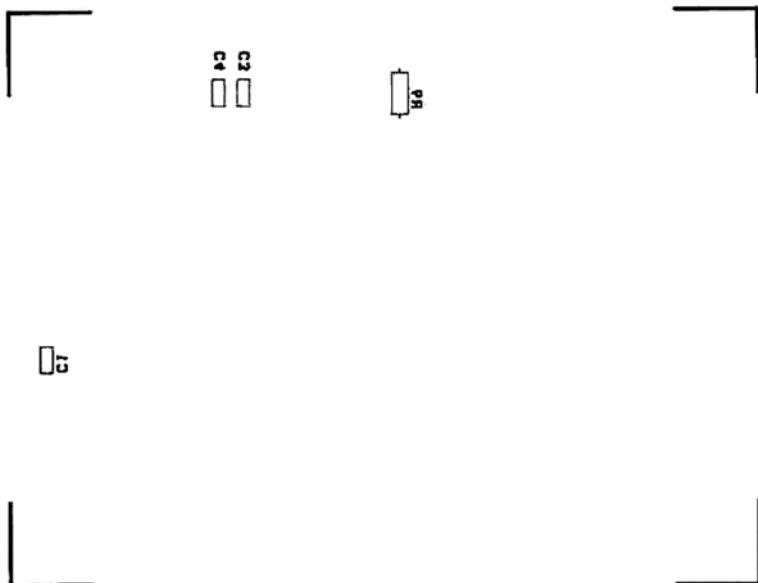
PCB component (*bottom*) layout of power and RFID unit of CH₄-monitoring device
